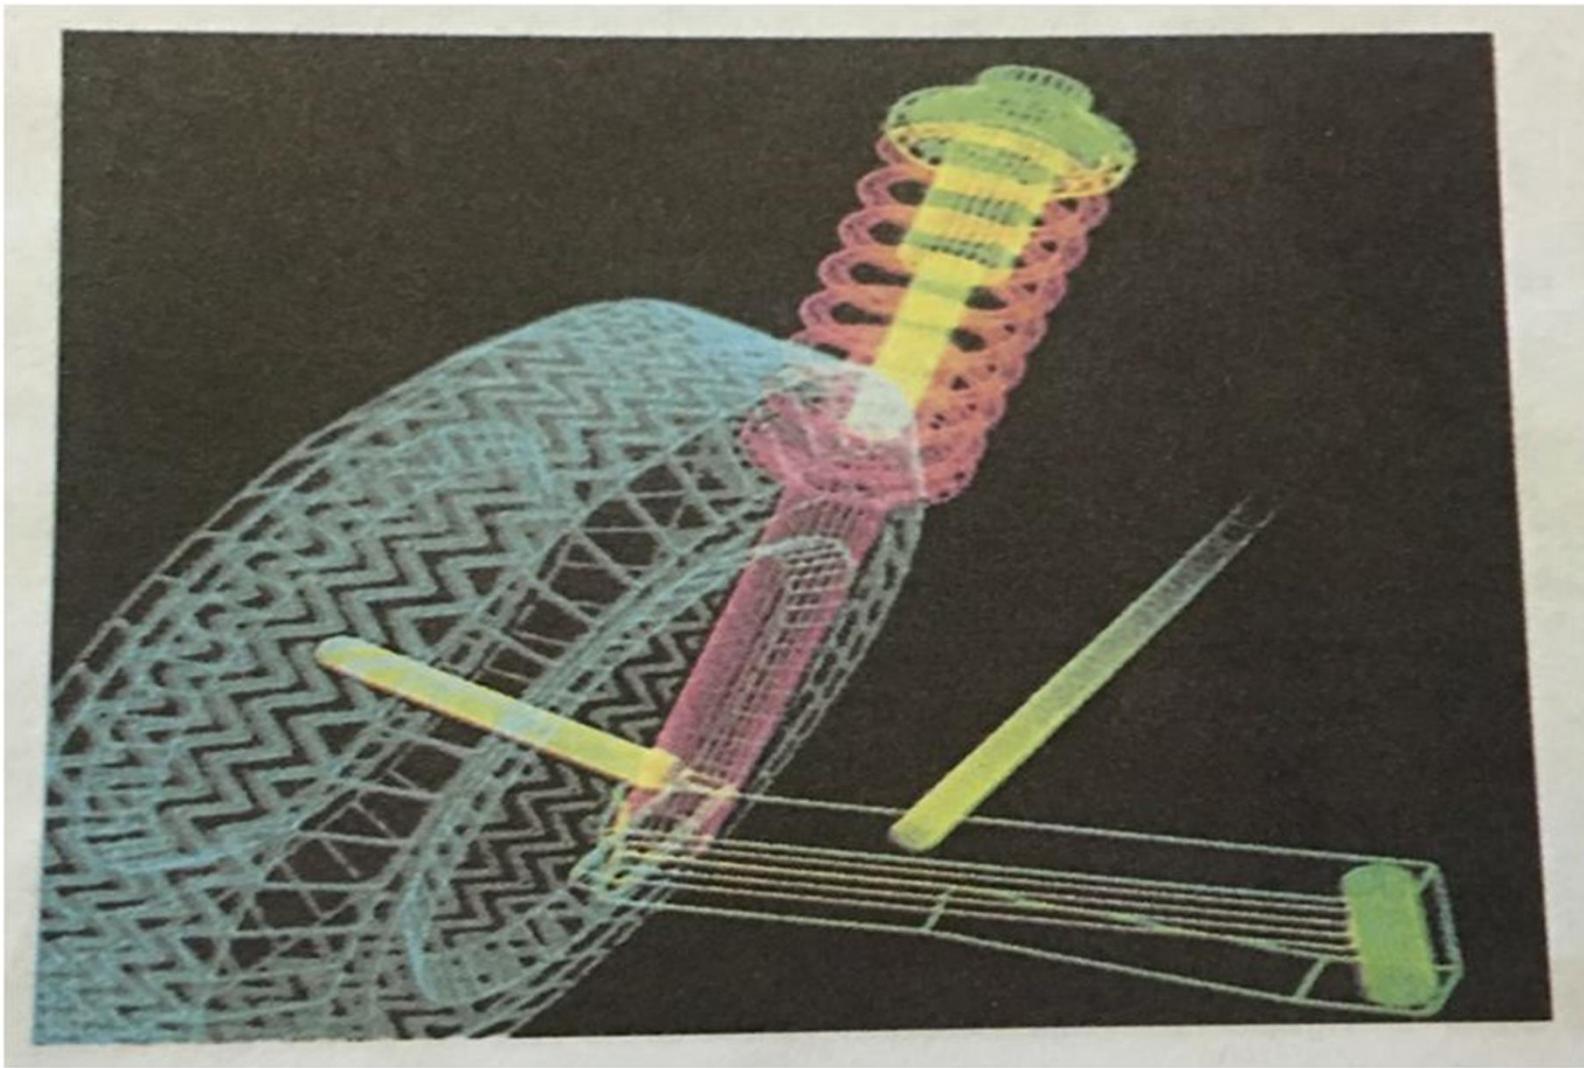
Color-coded wireframe display for an automobile wheel assembly
